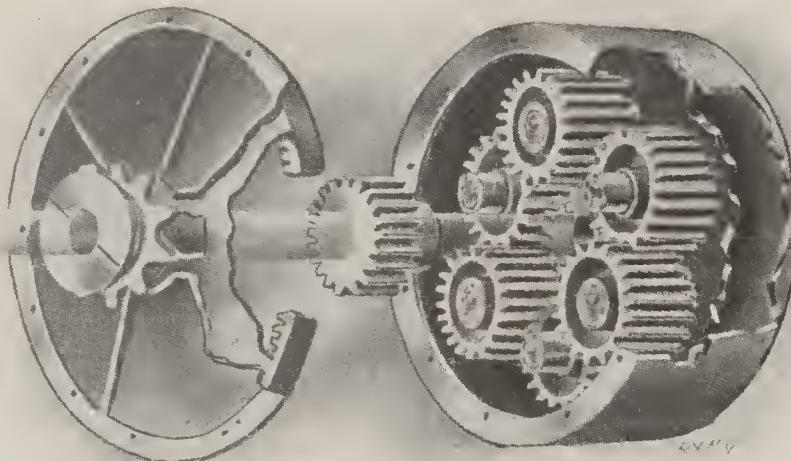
Planetary Transmission used on the Single-cylinder Engine
